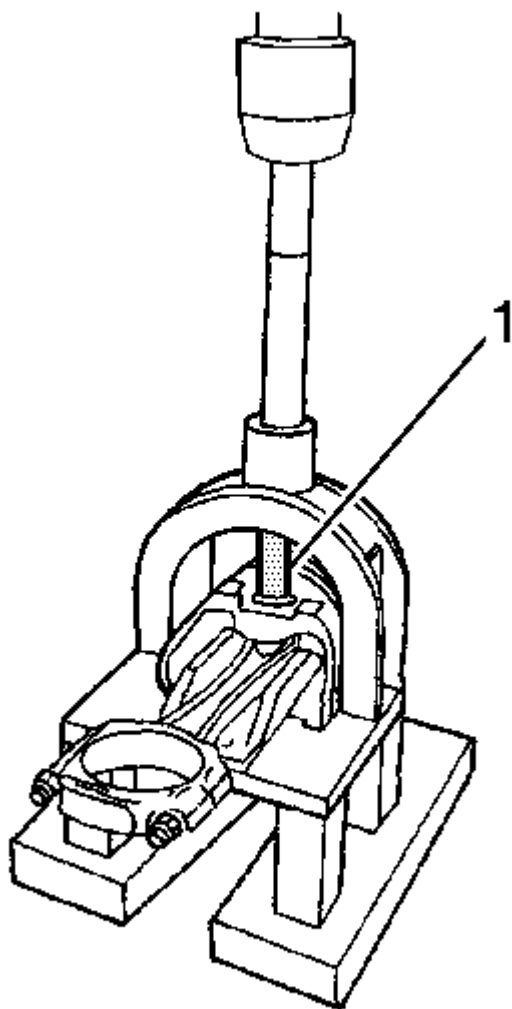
View Of Piston Pin Removal/Installation Tool J 24086-B
